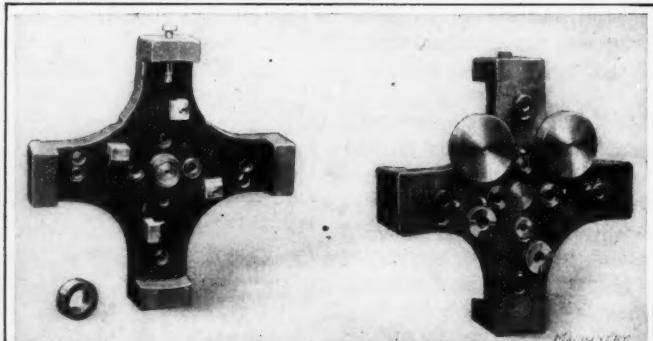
Example of Multiple-purpose Drill Jig used in performing Four Operations
